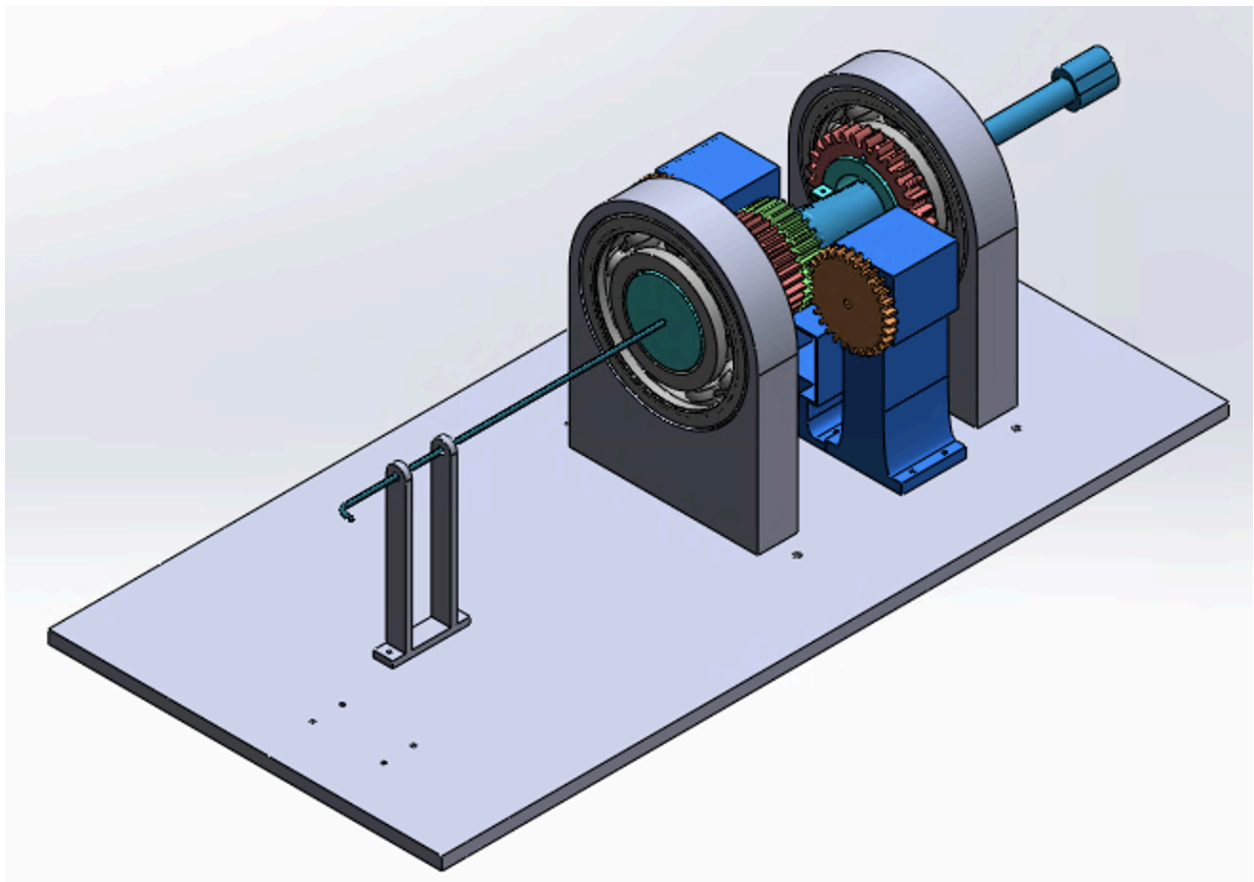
Isometric views of the Solidworks assembly of the robotic catheter system.
